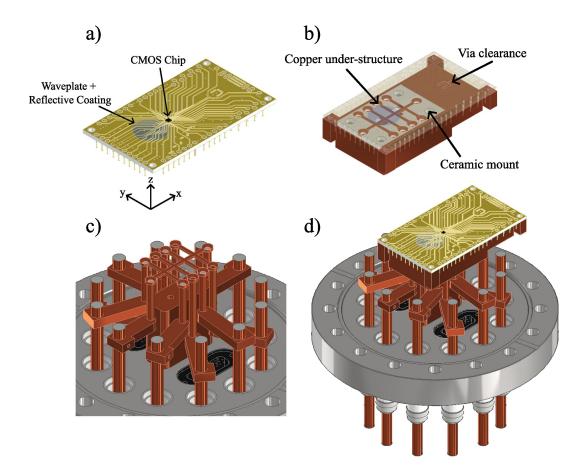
CAD models for the PCB and mounting to the feedthrough is shown. In a) chip0 is bonding the PCB with a neighbouring $\lambda/4$ -waveplate with a reflective coating on the underside which is used in the MOT formation. b) Shows the PCB mount which is designed to act as thermal sink for the PCB in addition to housing a copper wire under-structure which essentially a repeated H-wire and was added as an alternative to the PCB for the intermediate magnetic trap where the atoms are compressed and cooled before being loaded into the CMOS chip trap. c) Shows the how the copper under-structure is connected to an external power supply via the copper rods in the feedthrough. d) Shows the completed mounting.
